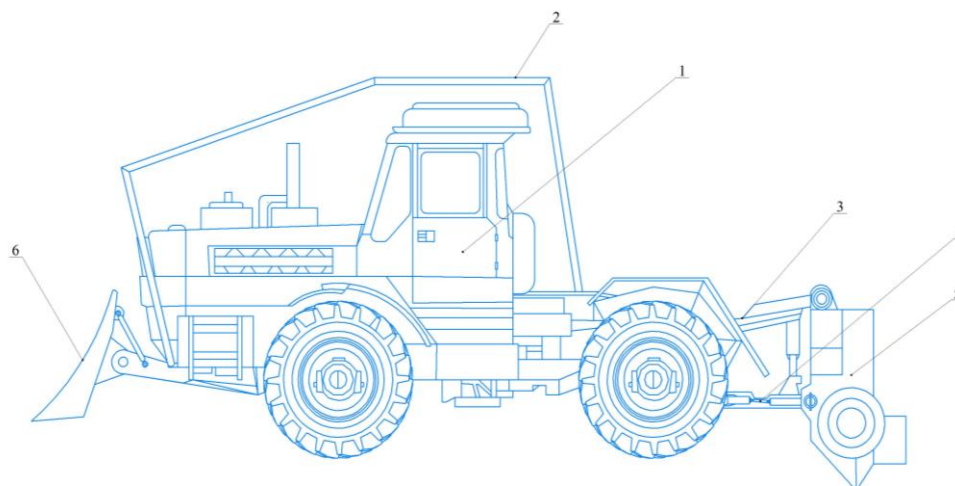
Wheeled tractor with attachments — soil-thrower-fire-break maker
